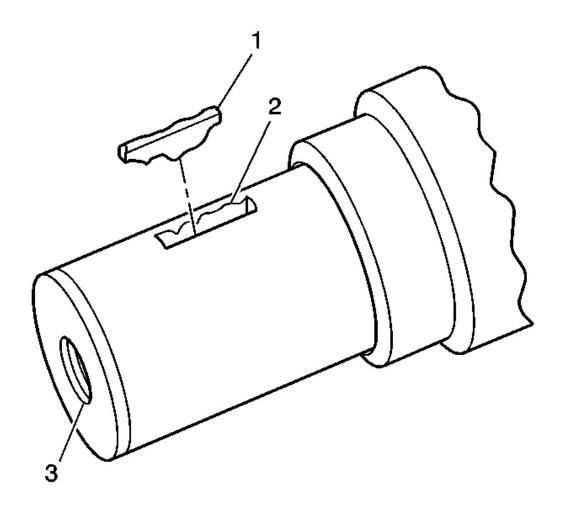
Crankshaft Balancer Key, Keyway & Threaded Hole Courtesy of GENERAL MOTORS CORP.
